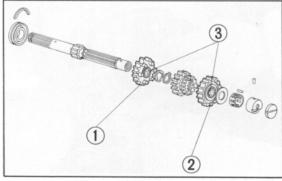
① Main shaft fourth gear ② Main shaft top gear
